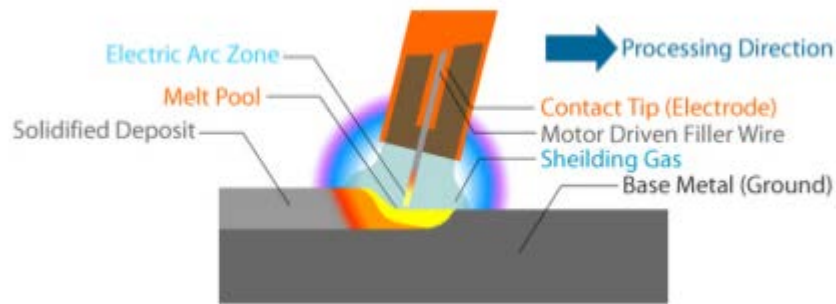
GMAW welding schematic, adapted from Rodrigues Parda (2016).
